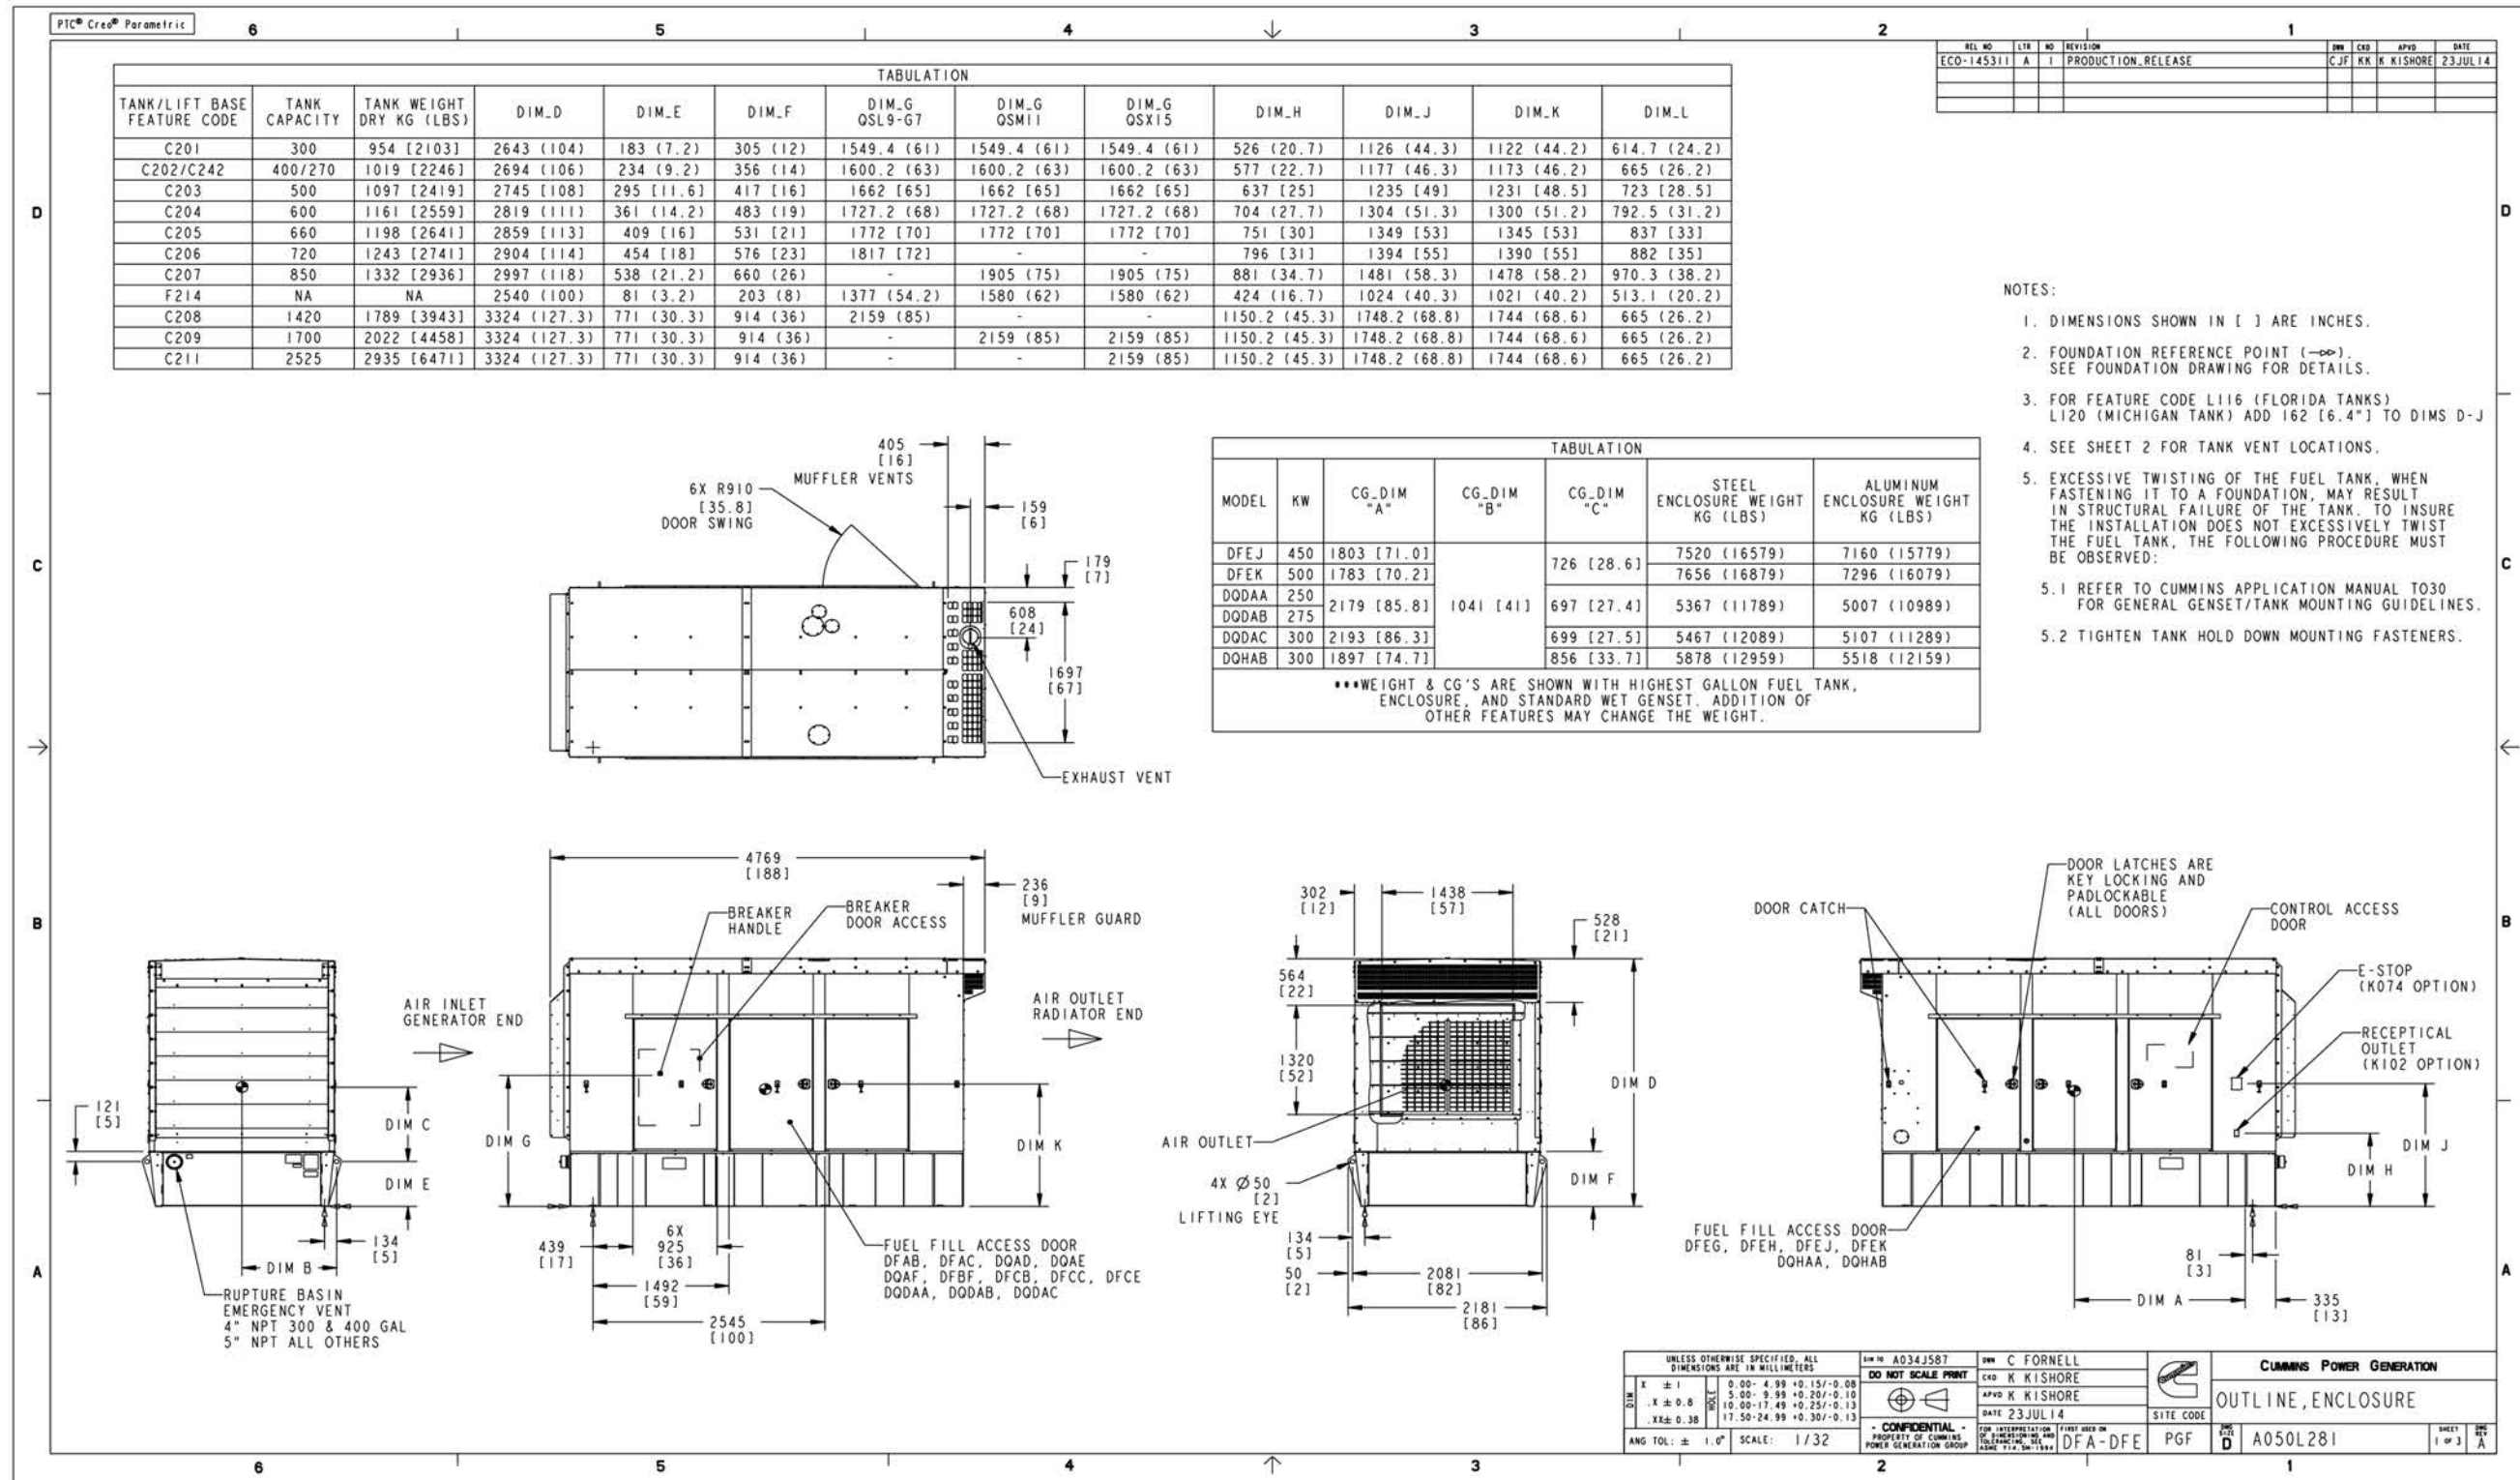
ENCLOSURE OUTLINE DRAWING SHEET 1 OF 3
